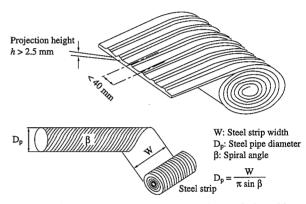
Steel strip and process for manufacturing steel pipe with outside surface projections
